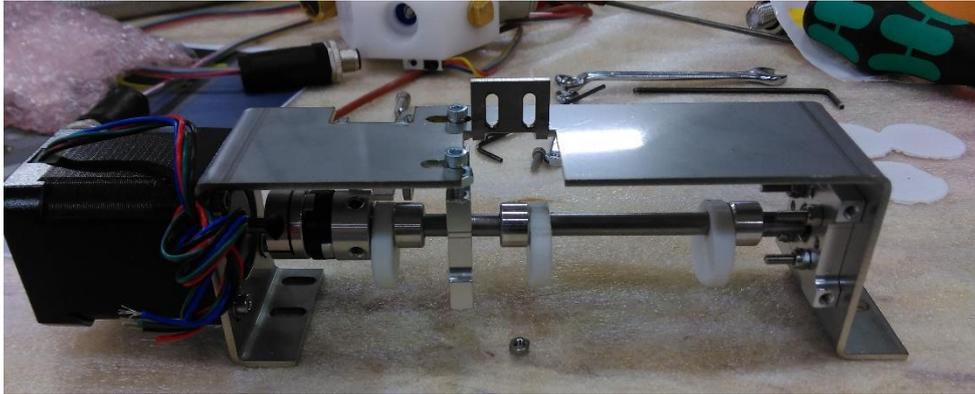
Partially assembled waste gate pipe actuation mechanism.
